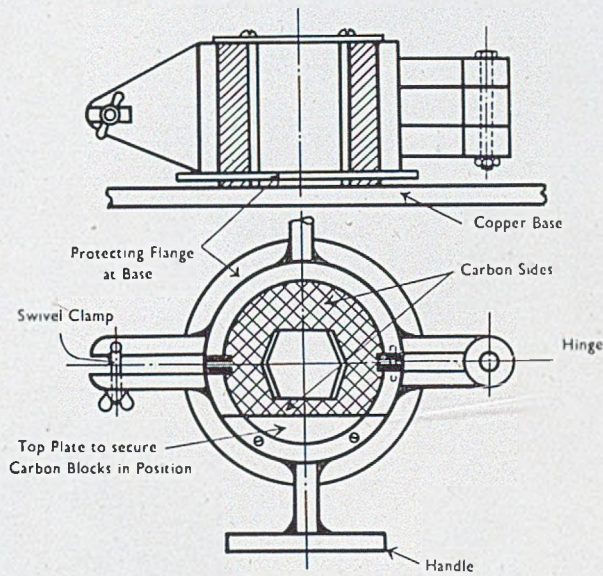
Spectrographic Test-Piece Mould for Casting a "Churchill Block". Size of test-piece $3\frac{1}{2}$ in. high, $1\frac{1}{4}$ in. wide, and $2\frac{1}{2}$ in. broad.
